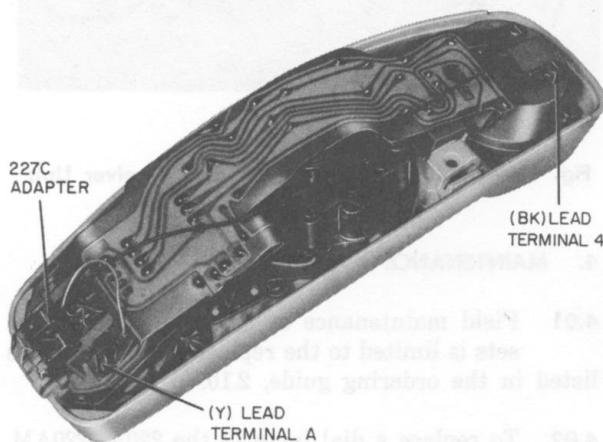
D-180824 Kit of Parts Installed in 220AL Hand Telephone Set
